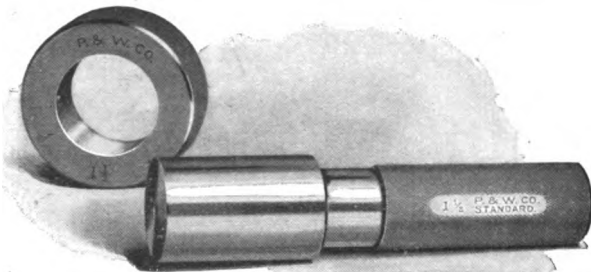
Standard Plug and Ring. Cylindrical Gauges.
